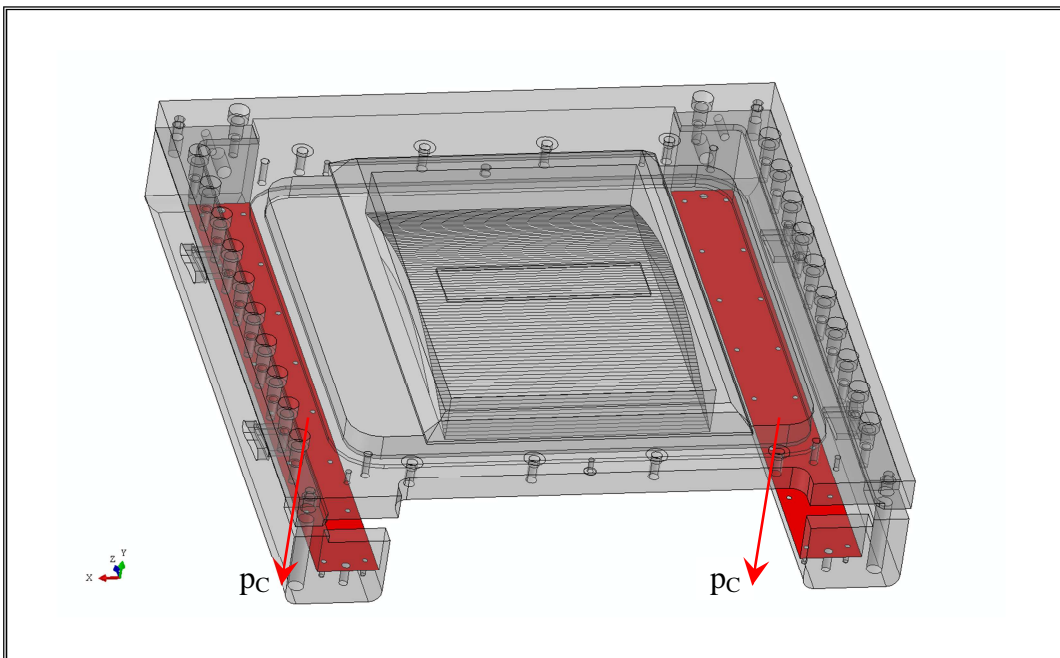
Pressure p_c along BP supports surfaces in contact with inclined cams.
